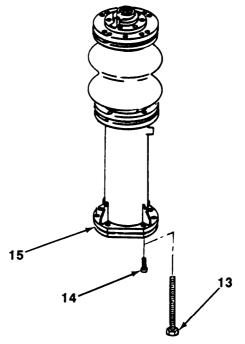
Lower Unit Disassembly Bolts installation and Removal (VR11C).
